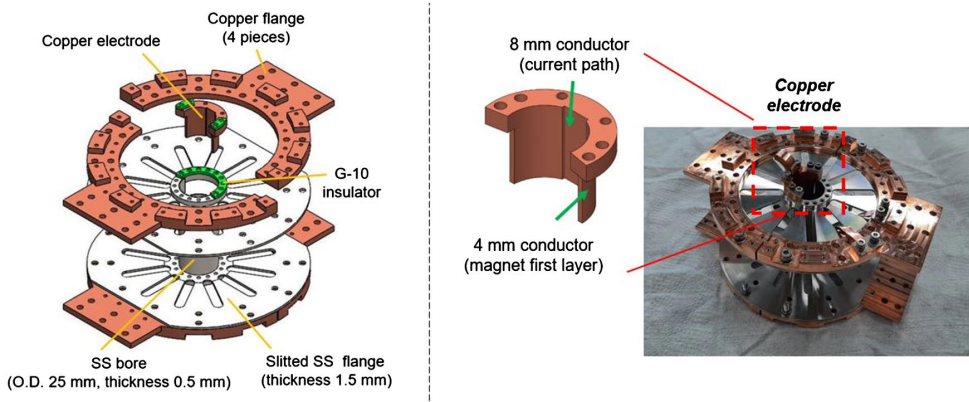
3-D sketch (left) and photograph (right) of the magnet bobbin structure
